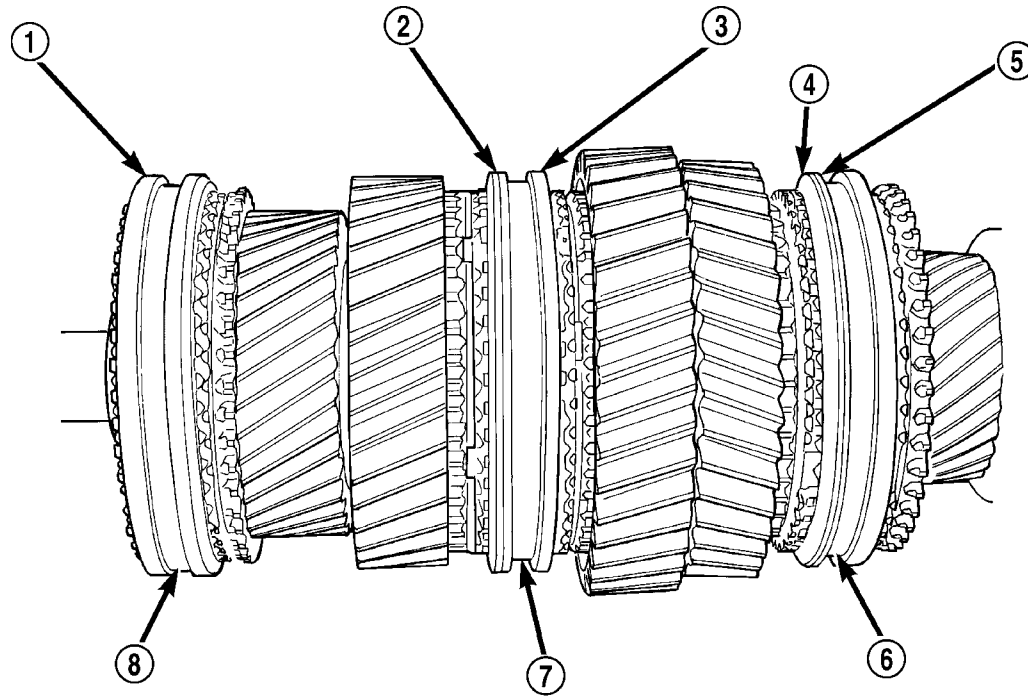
OUTPUT SHAFT BEARING SNAP
